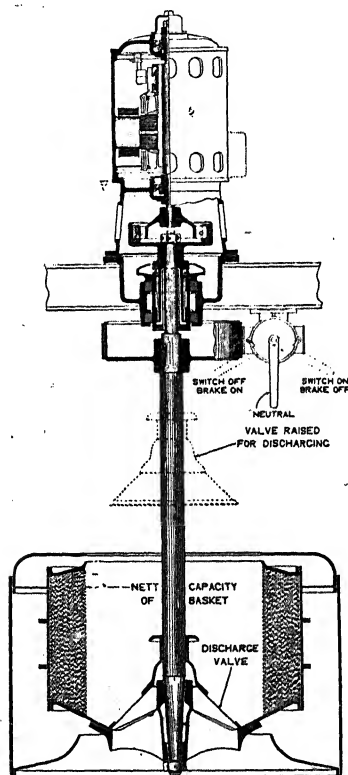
Section of an electrically-driven centrifugal, with fixed electro-motor attached to the upper end of the machine spindle.
